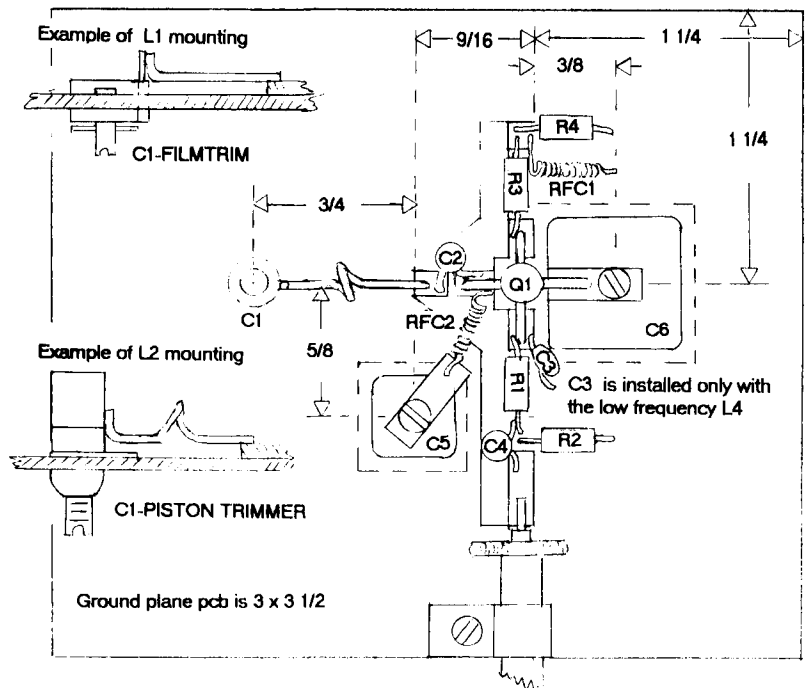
Layout of the components. C7, C8 and R5, R6 and R7 are mounted on the ground-plane PC board bottom.
